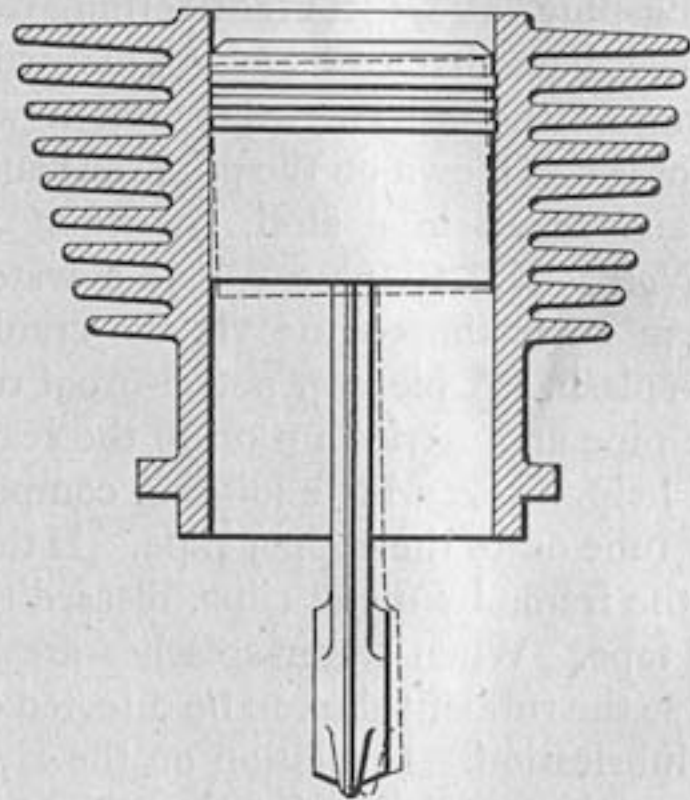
CHECKING CONNECTING-ROD ALIGNMENT
